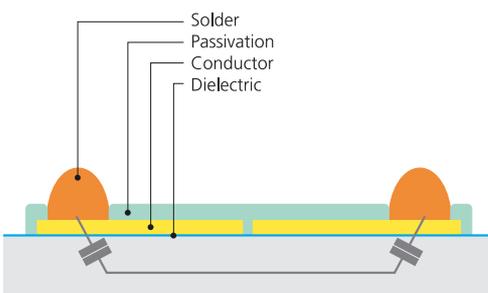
Cross sectional drawing of a chip capacitor with solder bumps.
